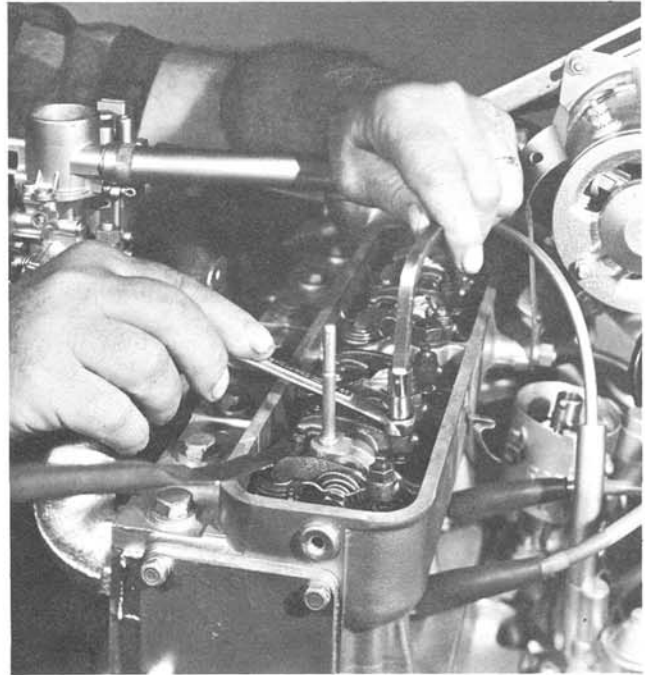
ROCKER ARM TAPPET ADJUSTMENT
